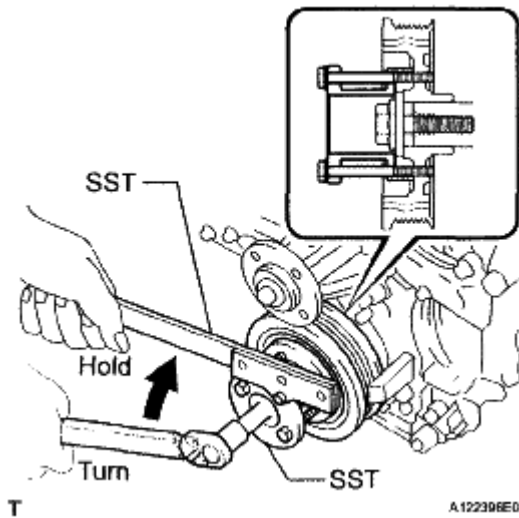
Installing Crankshaft Pulley Bolt Using SST
